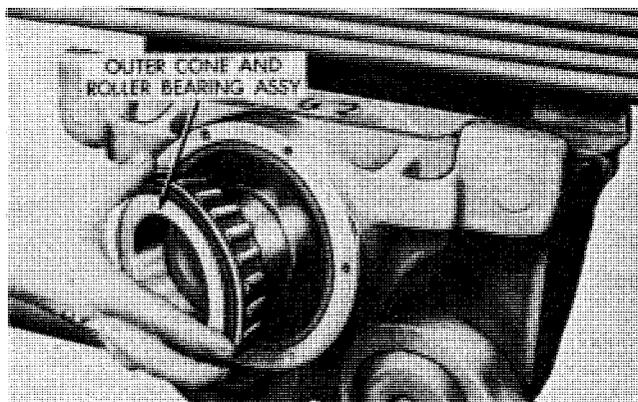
Spring seat and bearing replacement (Sheet 1 of 3)
